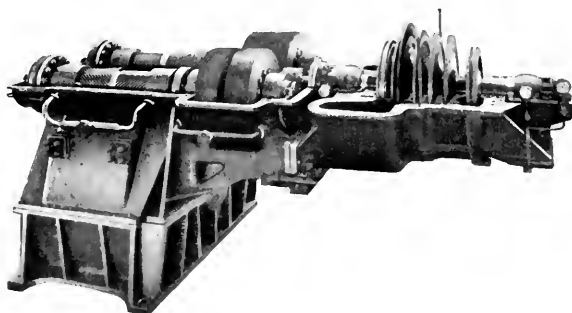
Two-plane Type of Marine Geared Turbine with Casing Removed Showing Turbine Rotor, High-speed Gears and Low-speed Pinions
